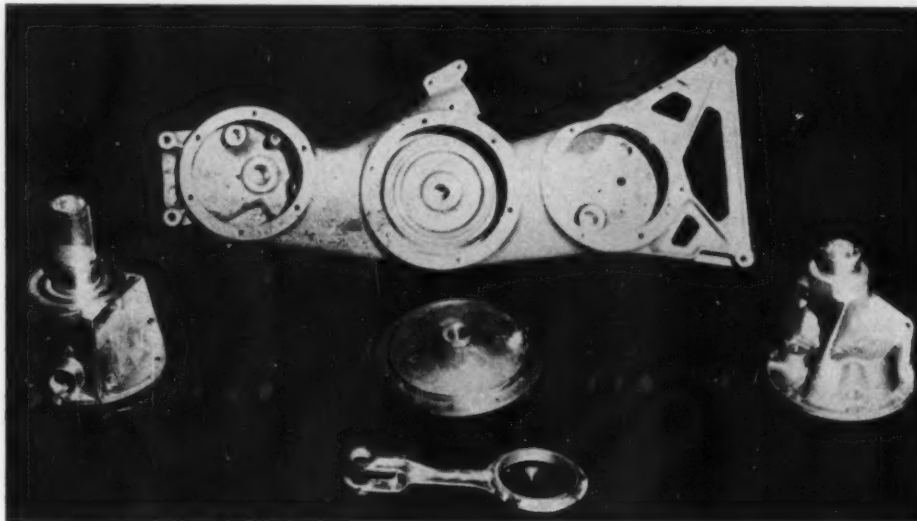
Machining of these sand cast aluminum gear-case parts, consisting of three covers and a connecting rod for Easy home washers, is done on highly efficient, semi-automatic machining lines.
